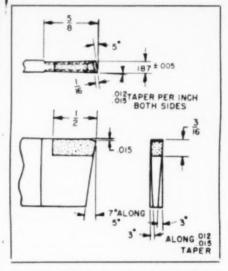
Carbide cut-off tool with standard step type chip breaker.
